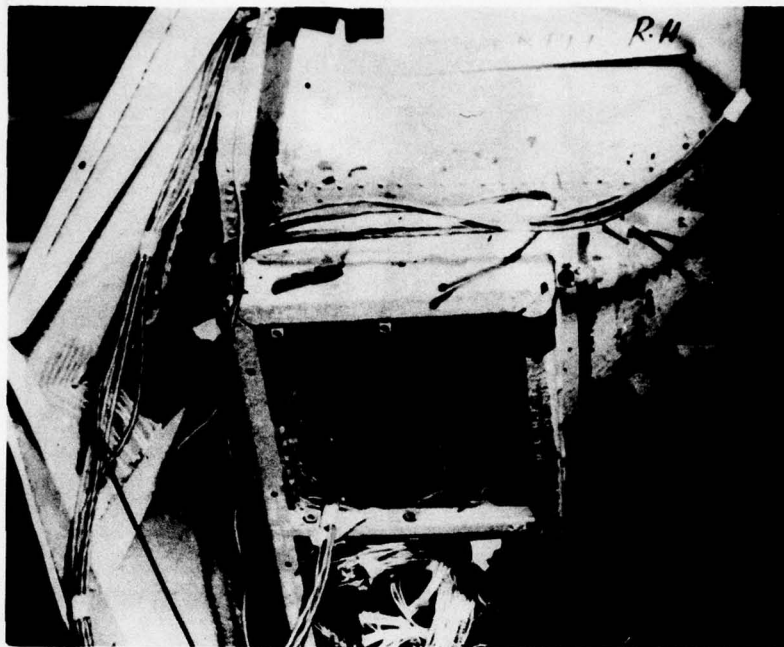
CH-47A Crash Test – Shear Failure of Side Skin, Right Cockpit.
